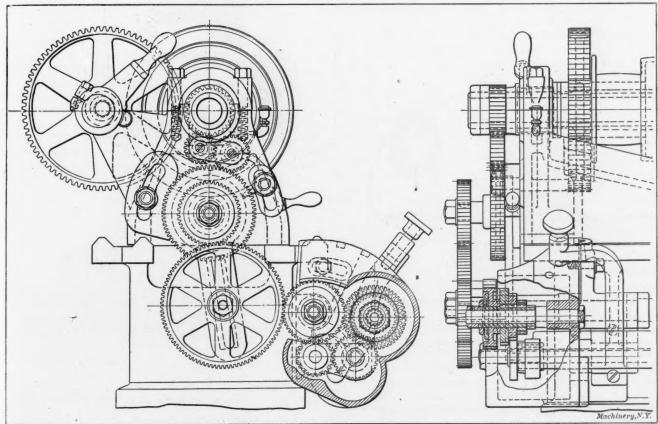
Design of Feed Box and Gearing, Milwaukee Machine Tool Co.'s 16-inch Lathe
